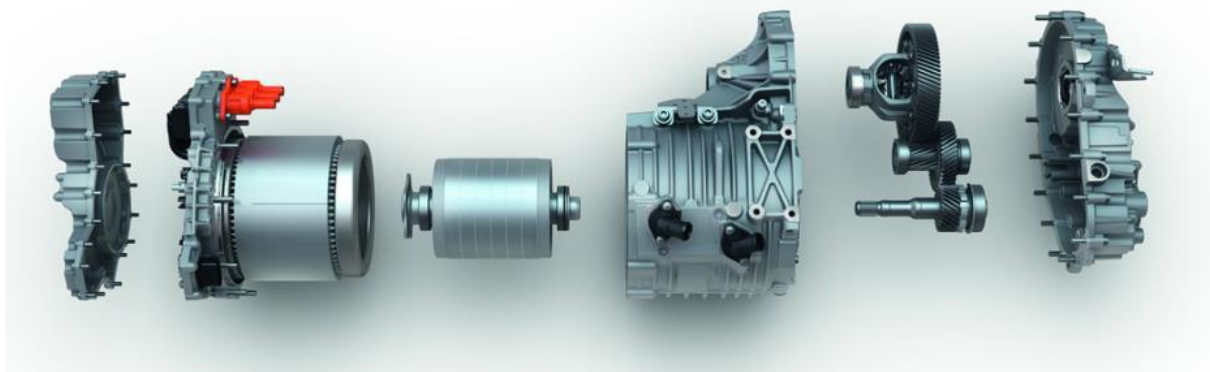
Electric Drive Unit Disassembly of VW e-Golf [6]
